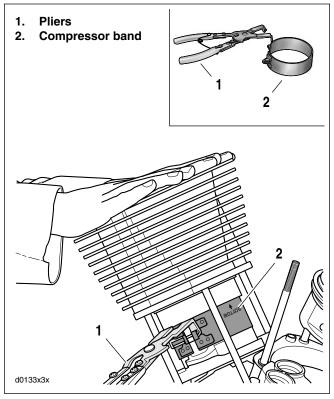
Piston Ring Compressor (Part No. 96333-51C)
